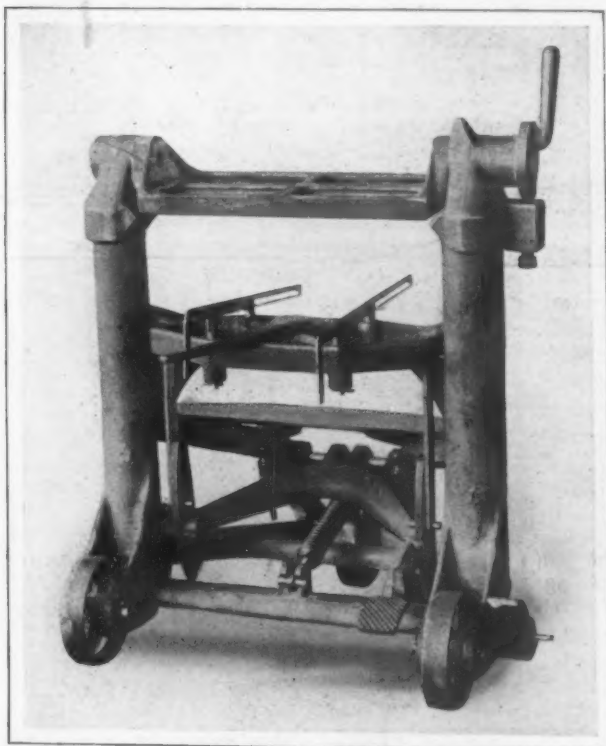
A Recently Developed Molding Machine of the Roll-Over Type
